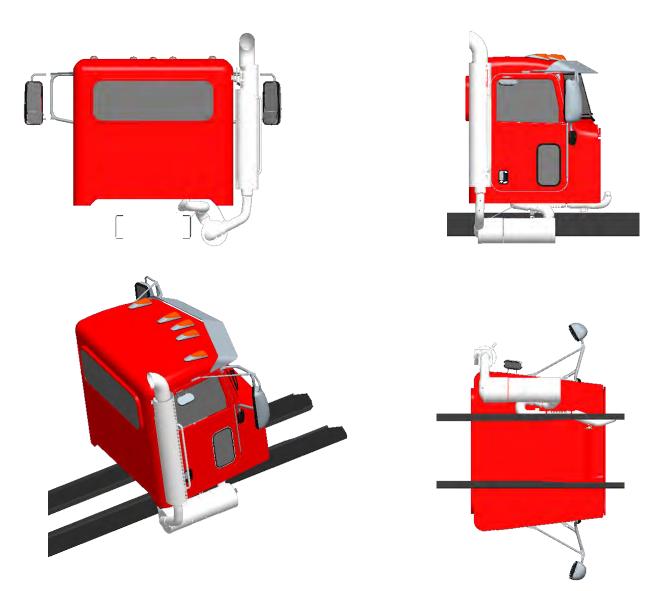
Exhaust Single RH Side of Cab ISL-G Only
